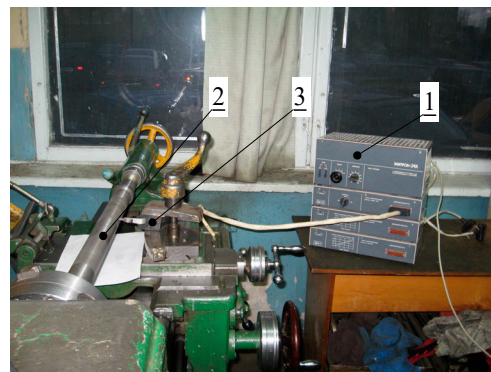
Bench for electric spark coating: 1 – Electric spark build-up unit “Elitron-24A”; 2 – pump rod; 3 – vibrator mounted on the support of a 16K20 lathe
